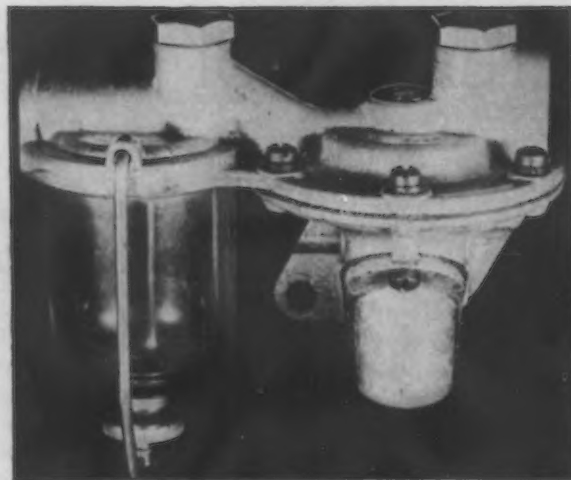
Automobile Fuel Pump Composed of Two Die Castings Made of the 4-3-0.1 Alloy
